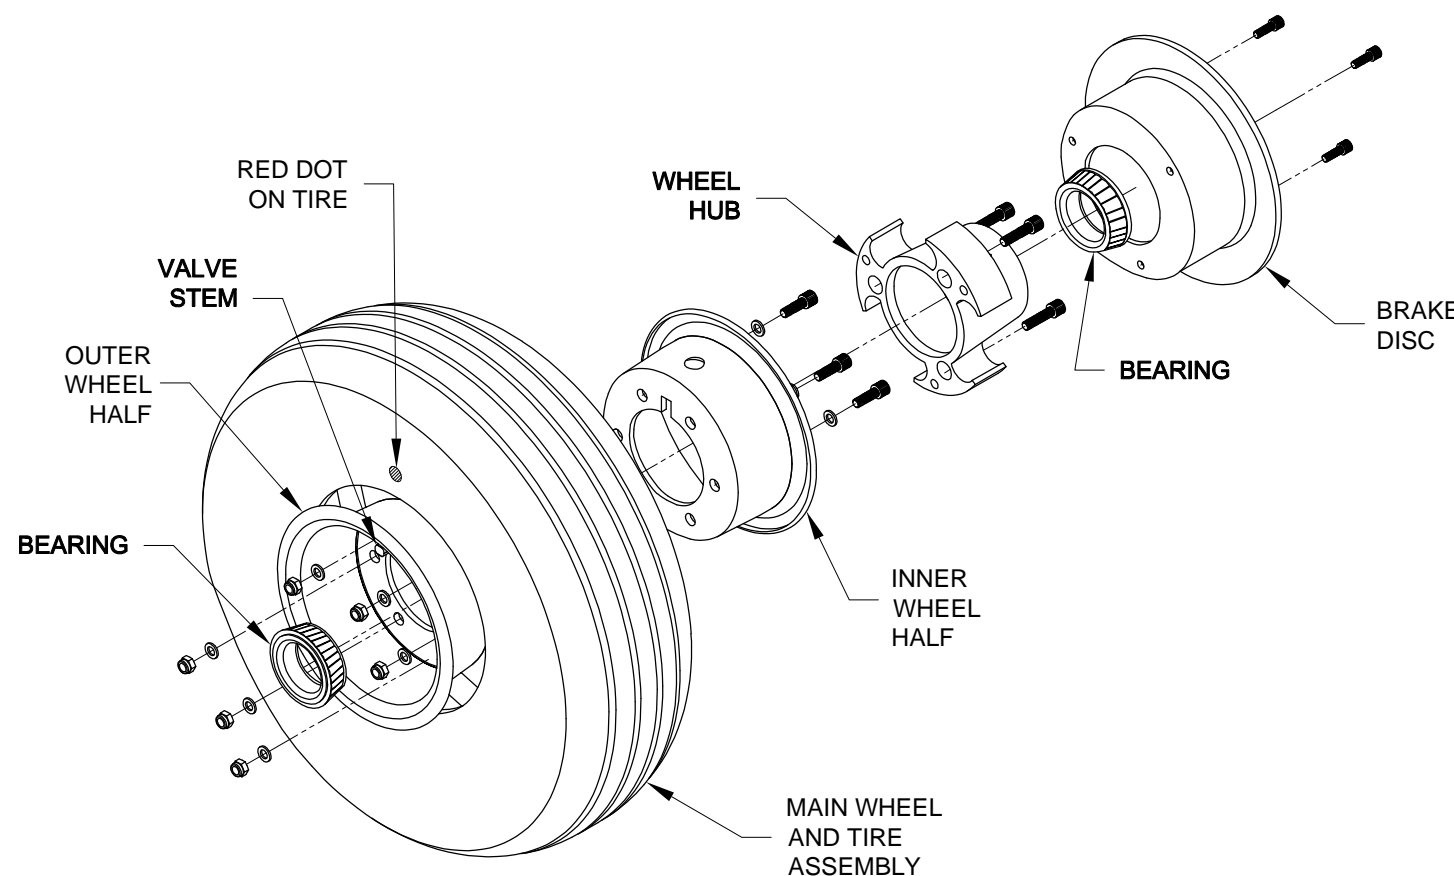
MAIN WHEEL AND TIRE ASSEMBLY
